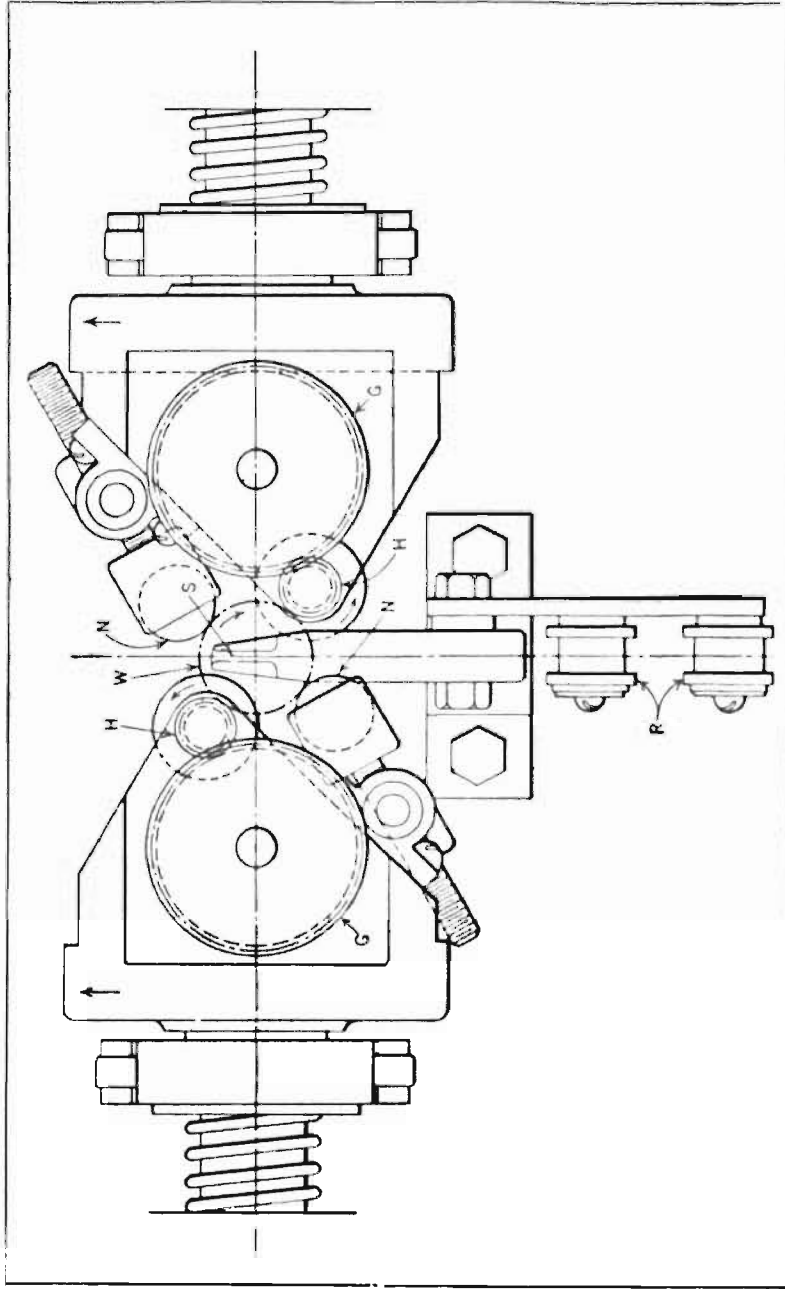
Plan View of Winding Mechanism Shown in Fig. 12
